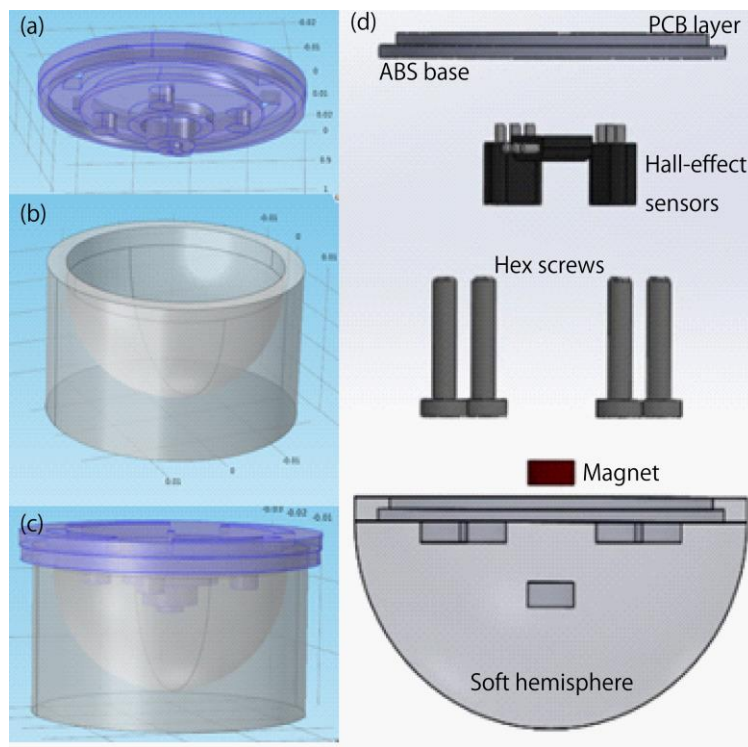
(a), (b) - upper and lower portions of the mold used to fabricate the soft hemisphere. (c) Mold assembly (d) Schematic representation of the components of the sensor.
